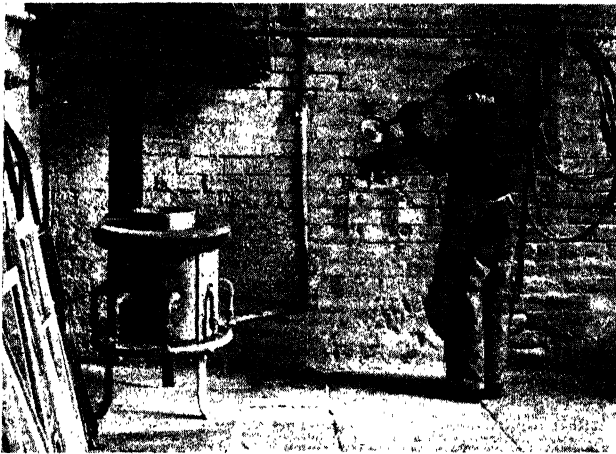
Method of Charging Molten Metal Pistol, and Furnace for Metal Melting.
